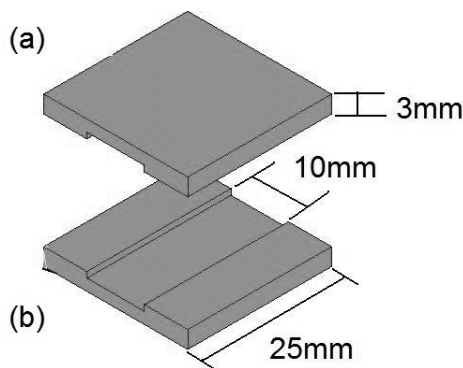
A schematic illustration of the square end-tab assembly with cut-out sections to accommodate the fibres: (a) top and (b) bottom end-tabs.
